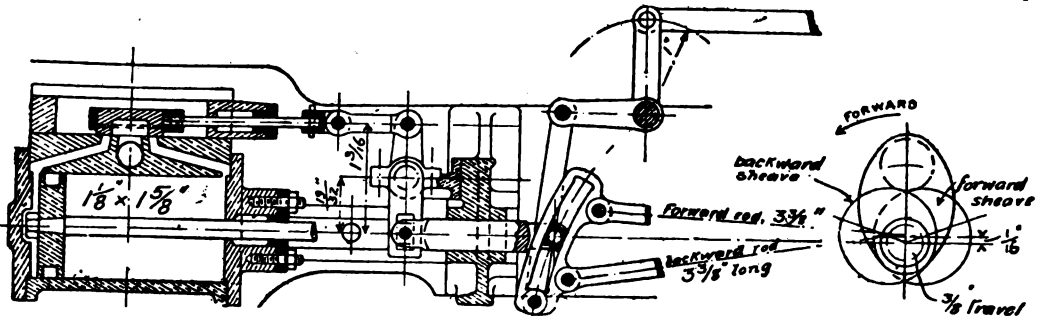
VALVE MOTION, SUITABLE FOR A $\frac{1}{2}$ -IN. SCALE MODEL C.R. SIX-COUPLED LOCO., WITH LAUNCH ENGINE AND SLIDING INTERMEDIATE VALVE SPINDLE.
